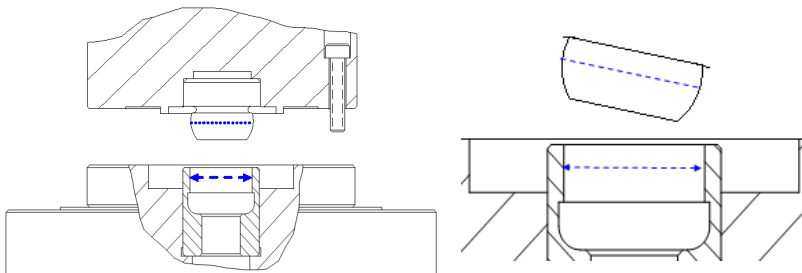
Spherical pilot (contact lines shown) with cylindrical bore and flat flanges
